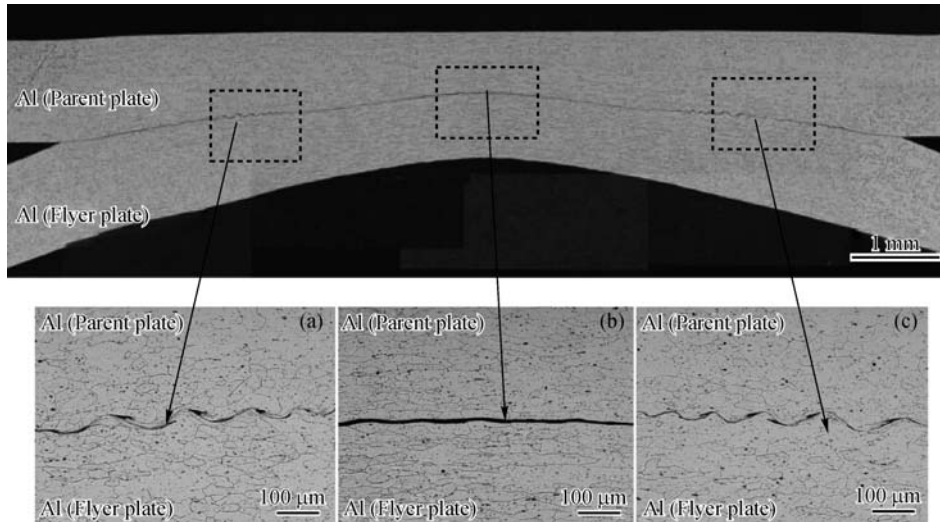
Optical micrographs of the cross sectional view of the Al/Al lap joint. (a) Welding interface; (b) central position of the bulged region; (c) welding interface [17]
